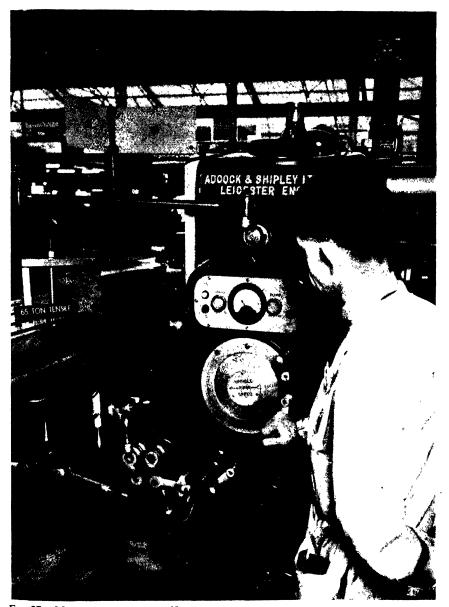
Machining a face of a 65-ton tensile-steel ingot, using a cemented tungsten-CARBIDE-TIPPED FACE MILL
